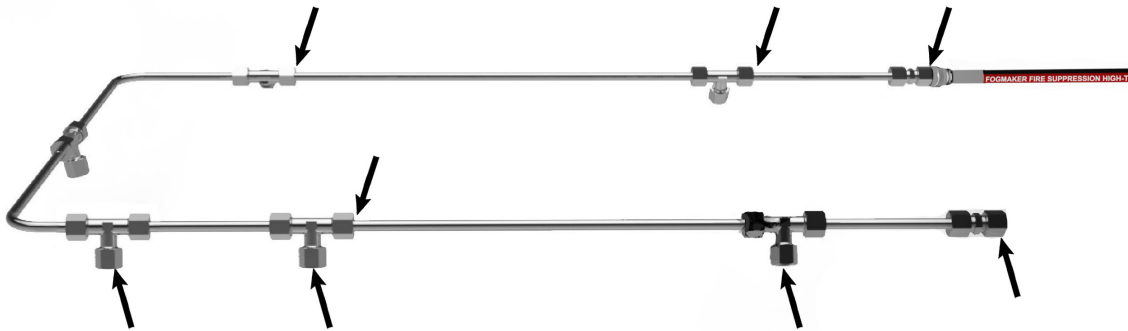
Make sure all connections are tightened and all nozzles are fitted (example pipe system).
